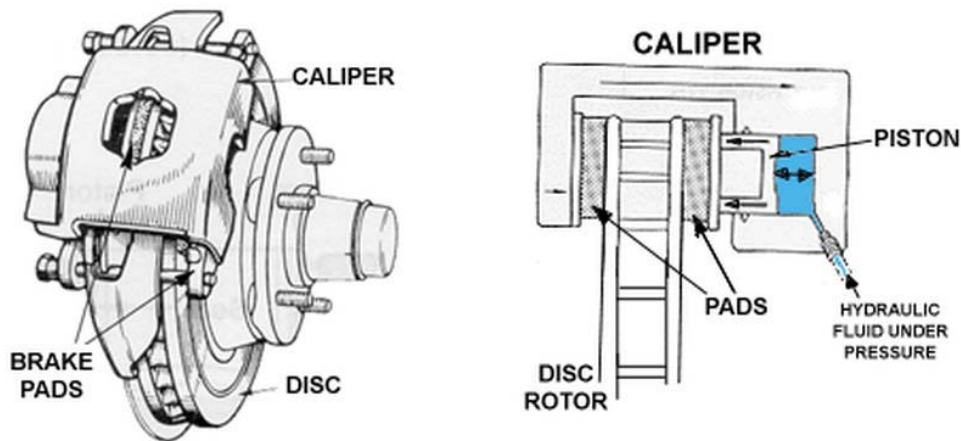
Brake disc assembly and floating calliper schematic representation
